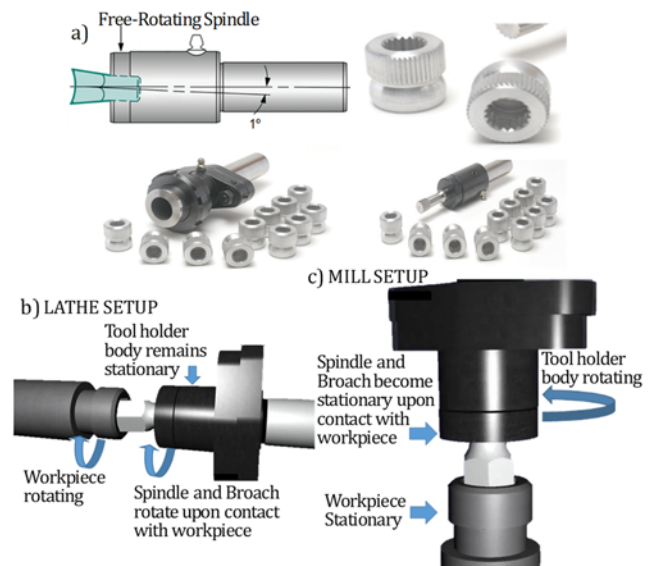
(a) Tool holder for a rotary broach and some examples of components manufactured by this process, (b) rotary broaching in a lathe and (c) rotary broaching in a mill [87].
